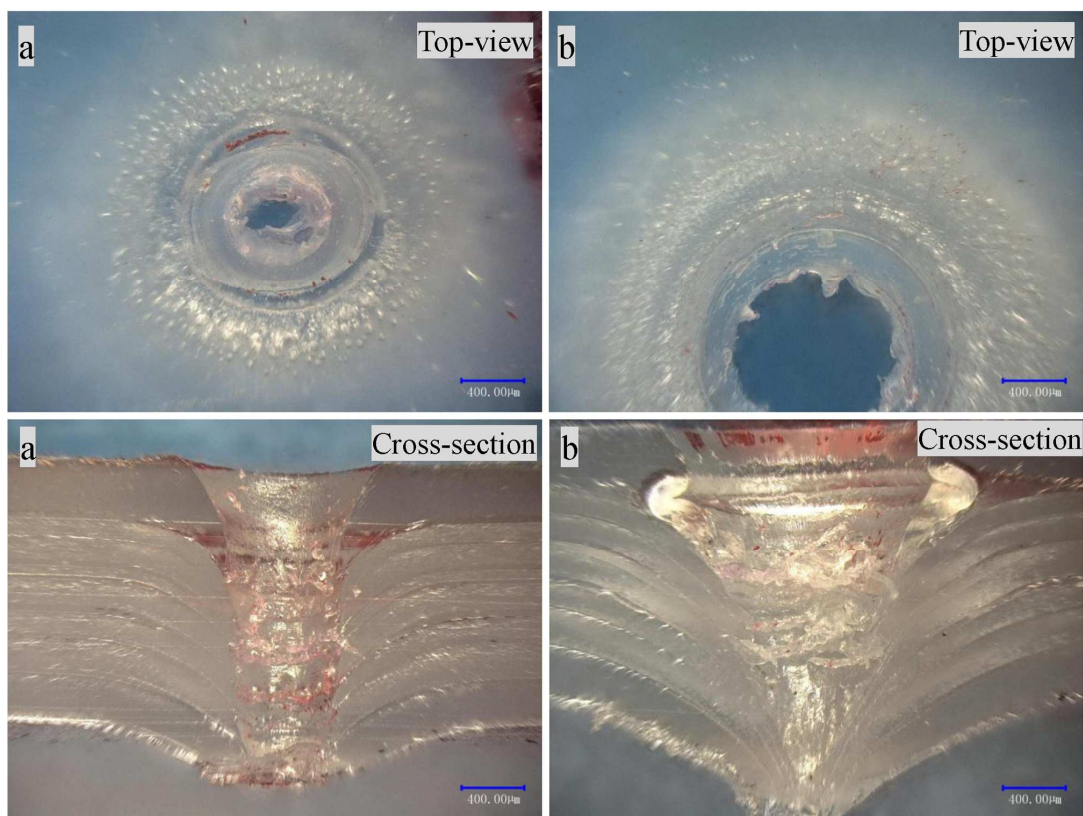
The puncture fracture damage zones of the 16-layer sample: (a) the probe tip diameter is 1 mm; (b) the probe tip diameter is 2 mm.
